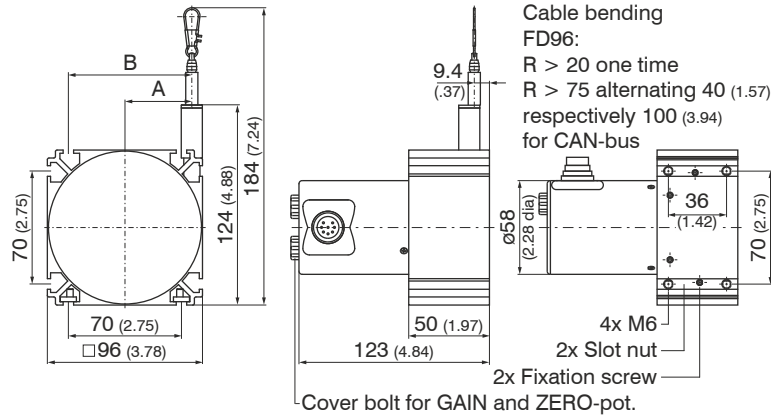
Dimensional drawing ... - FD96 - SR - UII, dimensions in mm (inches), not to scale
